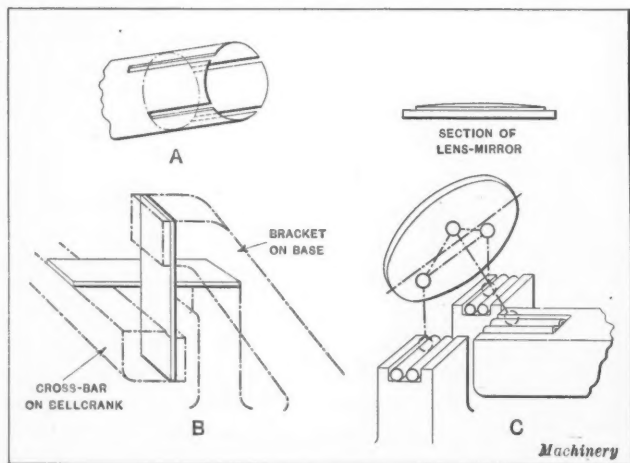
(A) End of Slotted Spindle Housing; (B) Device through which the Barrel Movement is multiplied and transferred to the Lens; (C) Method of mounting Lens Disk
